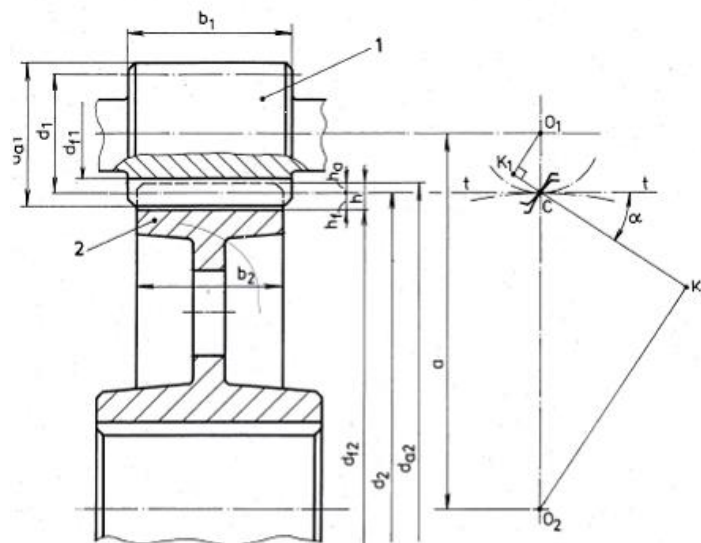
Geometrical elements of the straight teeth gear wheel, involute profile, and unmodified tothing
